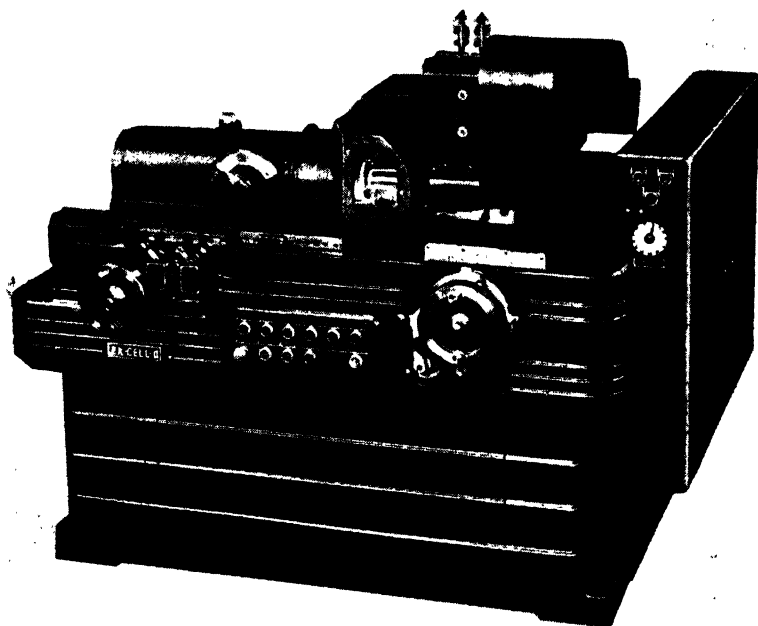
EX-CELL-O PRECISION THREAD GRINDER
